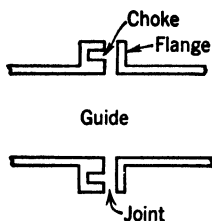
Choke flange junction for use in wave guide assemblies.
